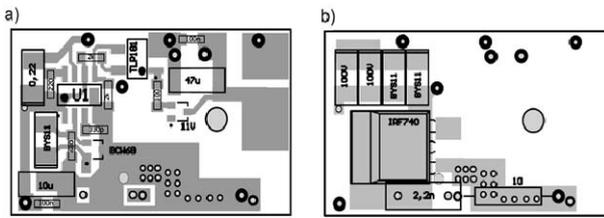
View of two-sided printed circuit board power supply size 42x26 mm a) BOTTOM side; b) From TOP page
